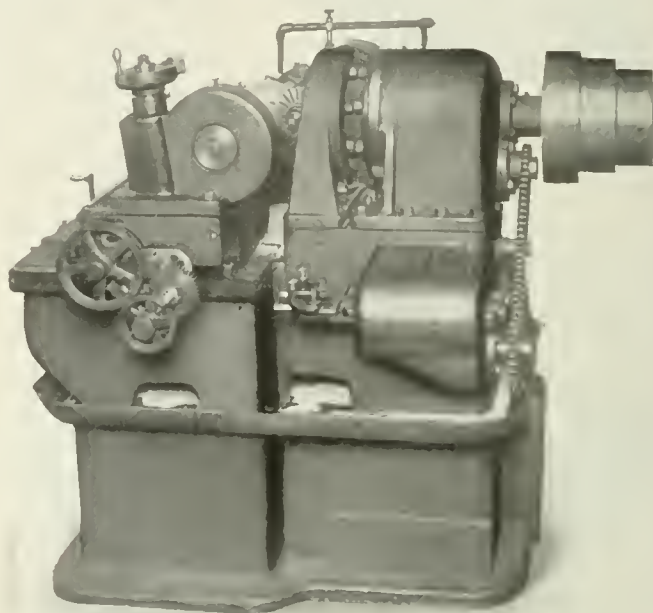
Side View showing Outboard Support for Swiveling Head and Gear Box for Controlling Work Speed
